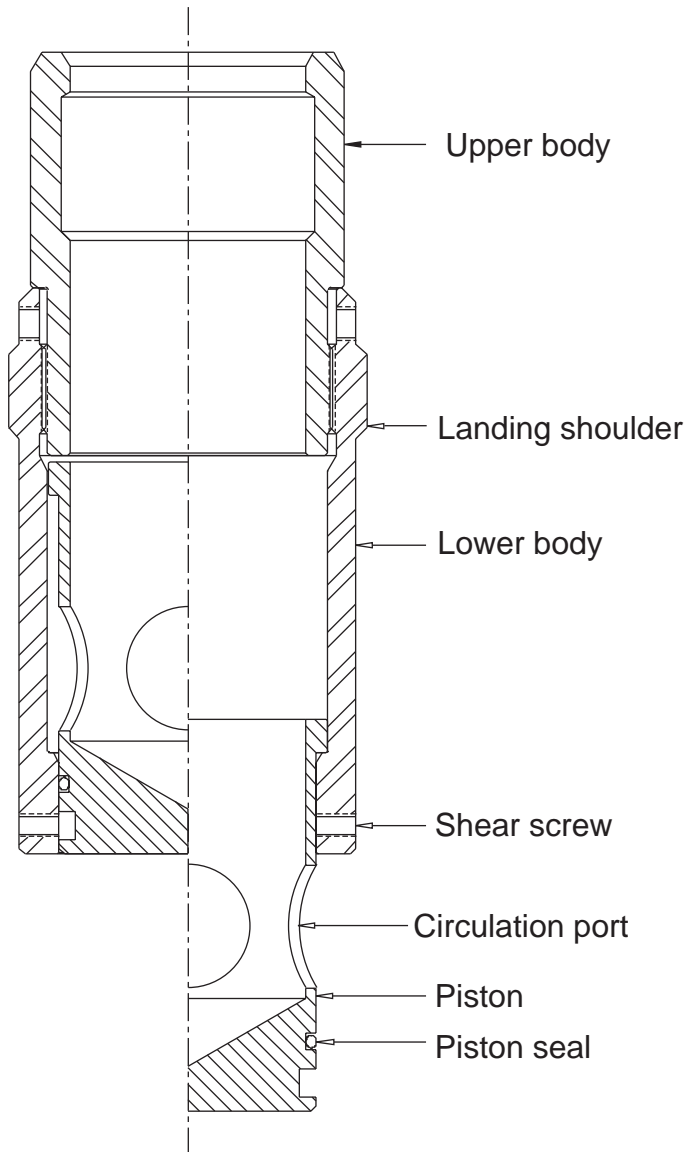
Schematic drawing of the HDS hanger bearing assembly.
